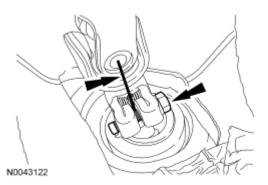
Locating Steering Column Shaft Index Mark And Bolt Courtesy of FORD MOTOR CO.
